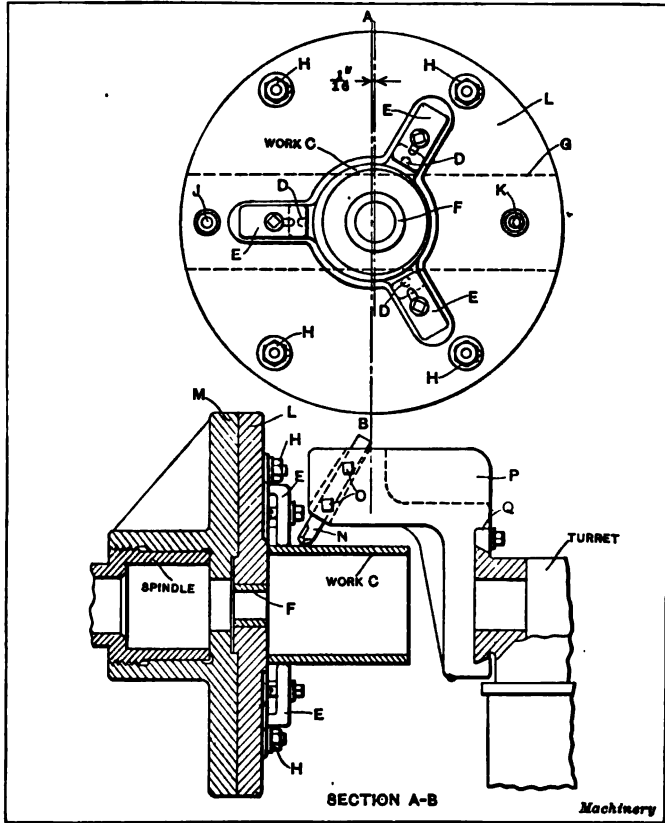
Eccentric Turning Fixture for Horizontal Turret Lathe
